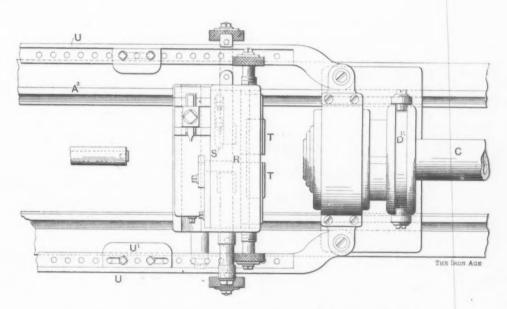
Enlarged Plan View of Rod Chuck and Cutting Tool Guides.
